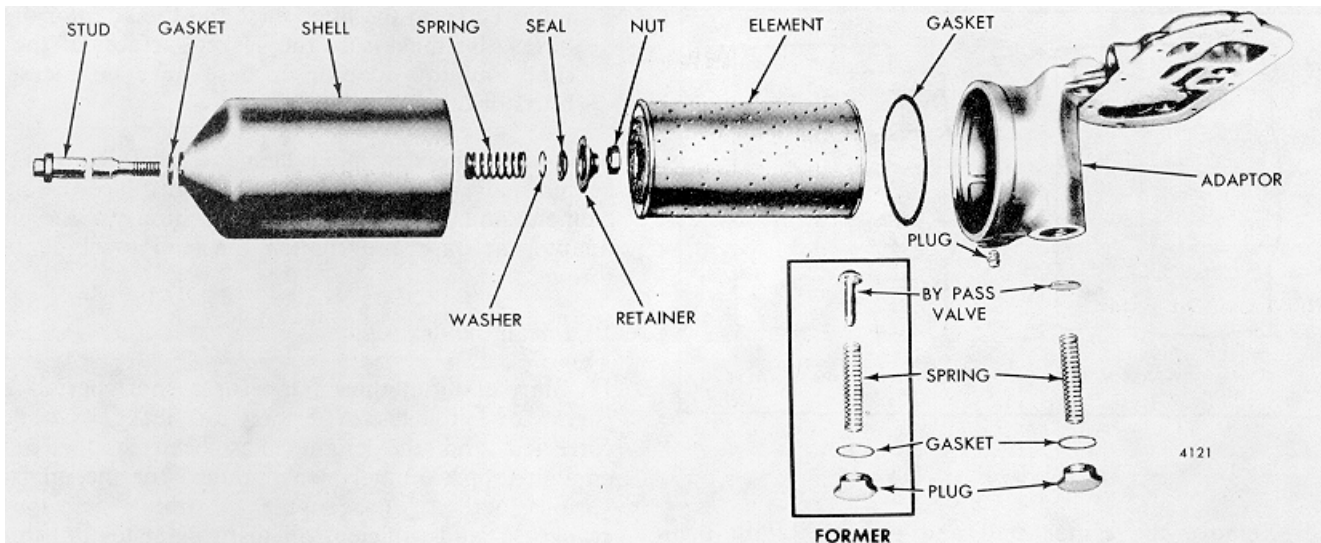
Full-Flow Oil Filter Details and Relative Location of Parts
